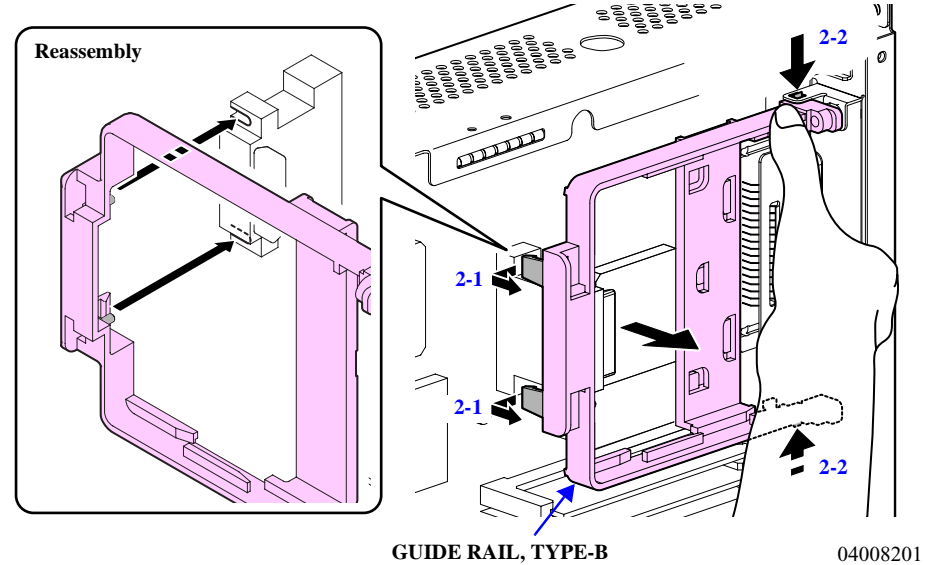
Removal of GUIDE RAIL, TYPE-B
